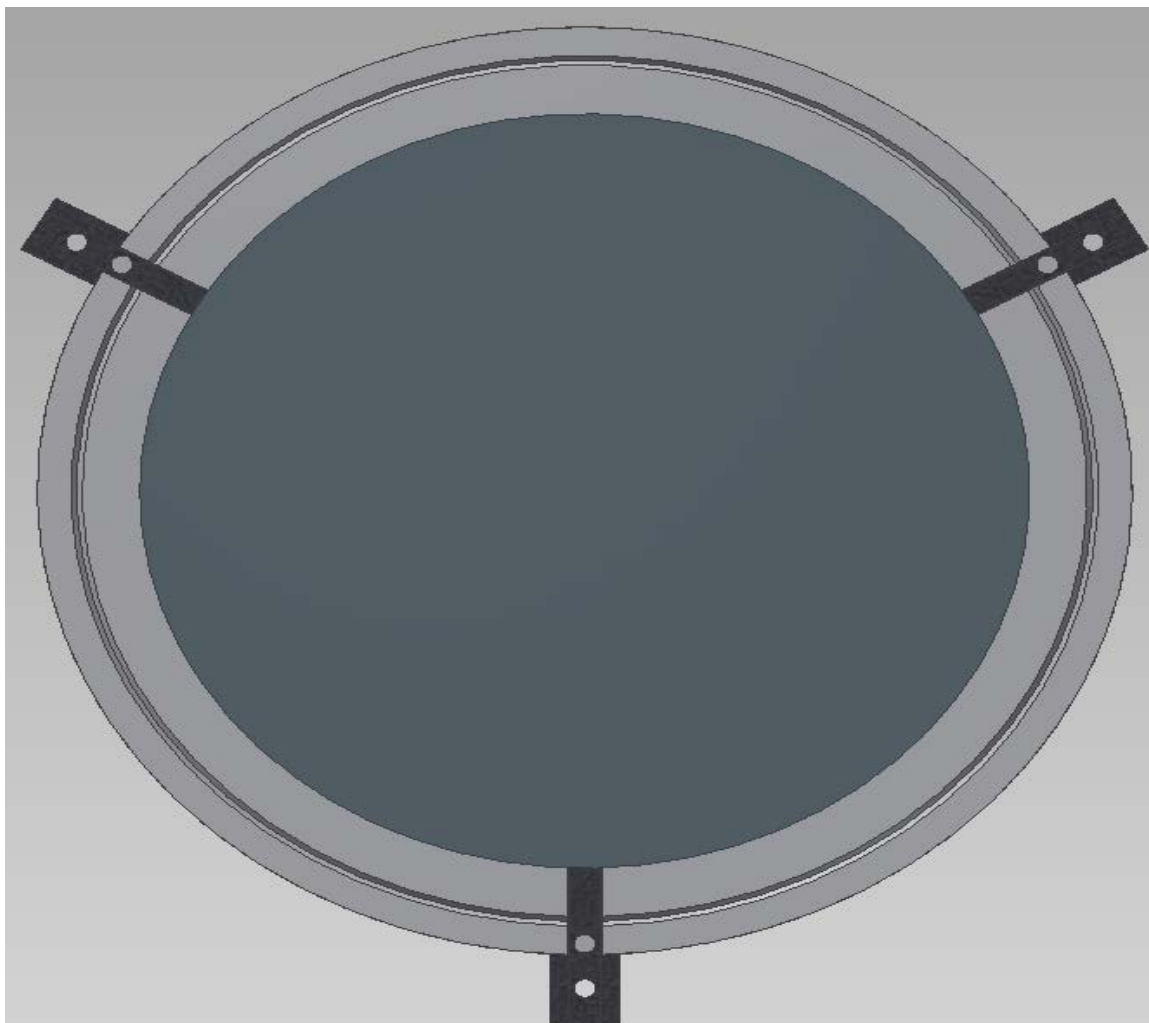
Top View of sample on XRD mounting face plate with T-jaw fixtures.
